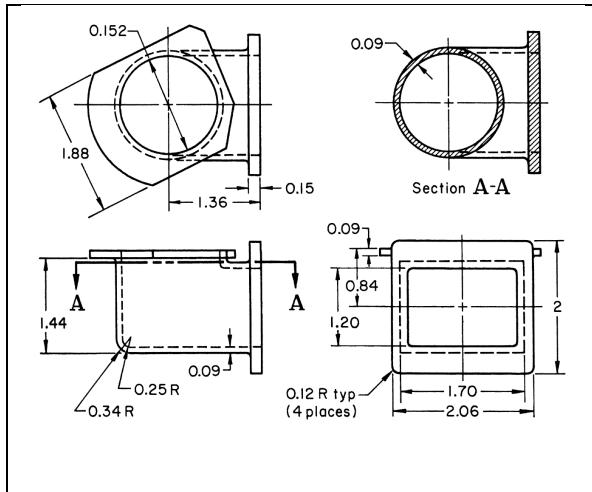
Aluminum Investment Casting. Aluminum Investment Casting. Well-designed rigging system that accommodated uniform walls by incorporating efficient gating areas.
